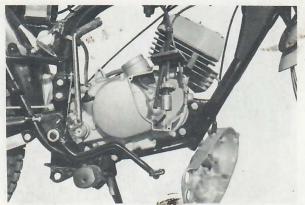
Unscrewing Sigine mounting bolts
